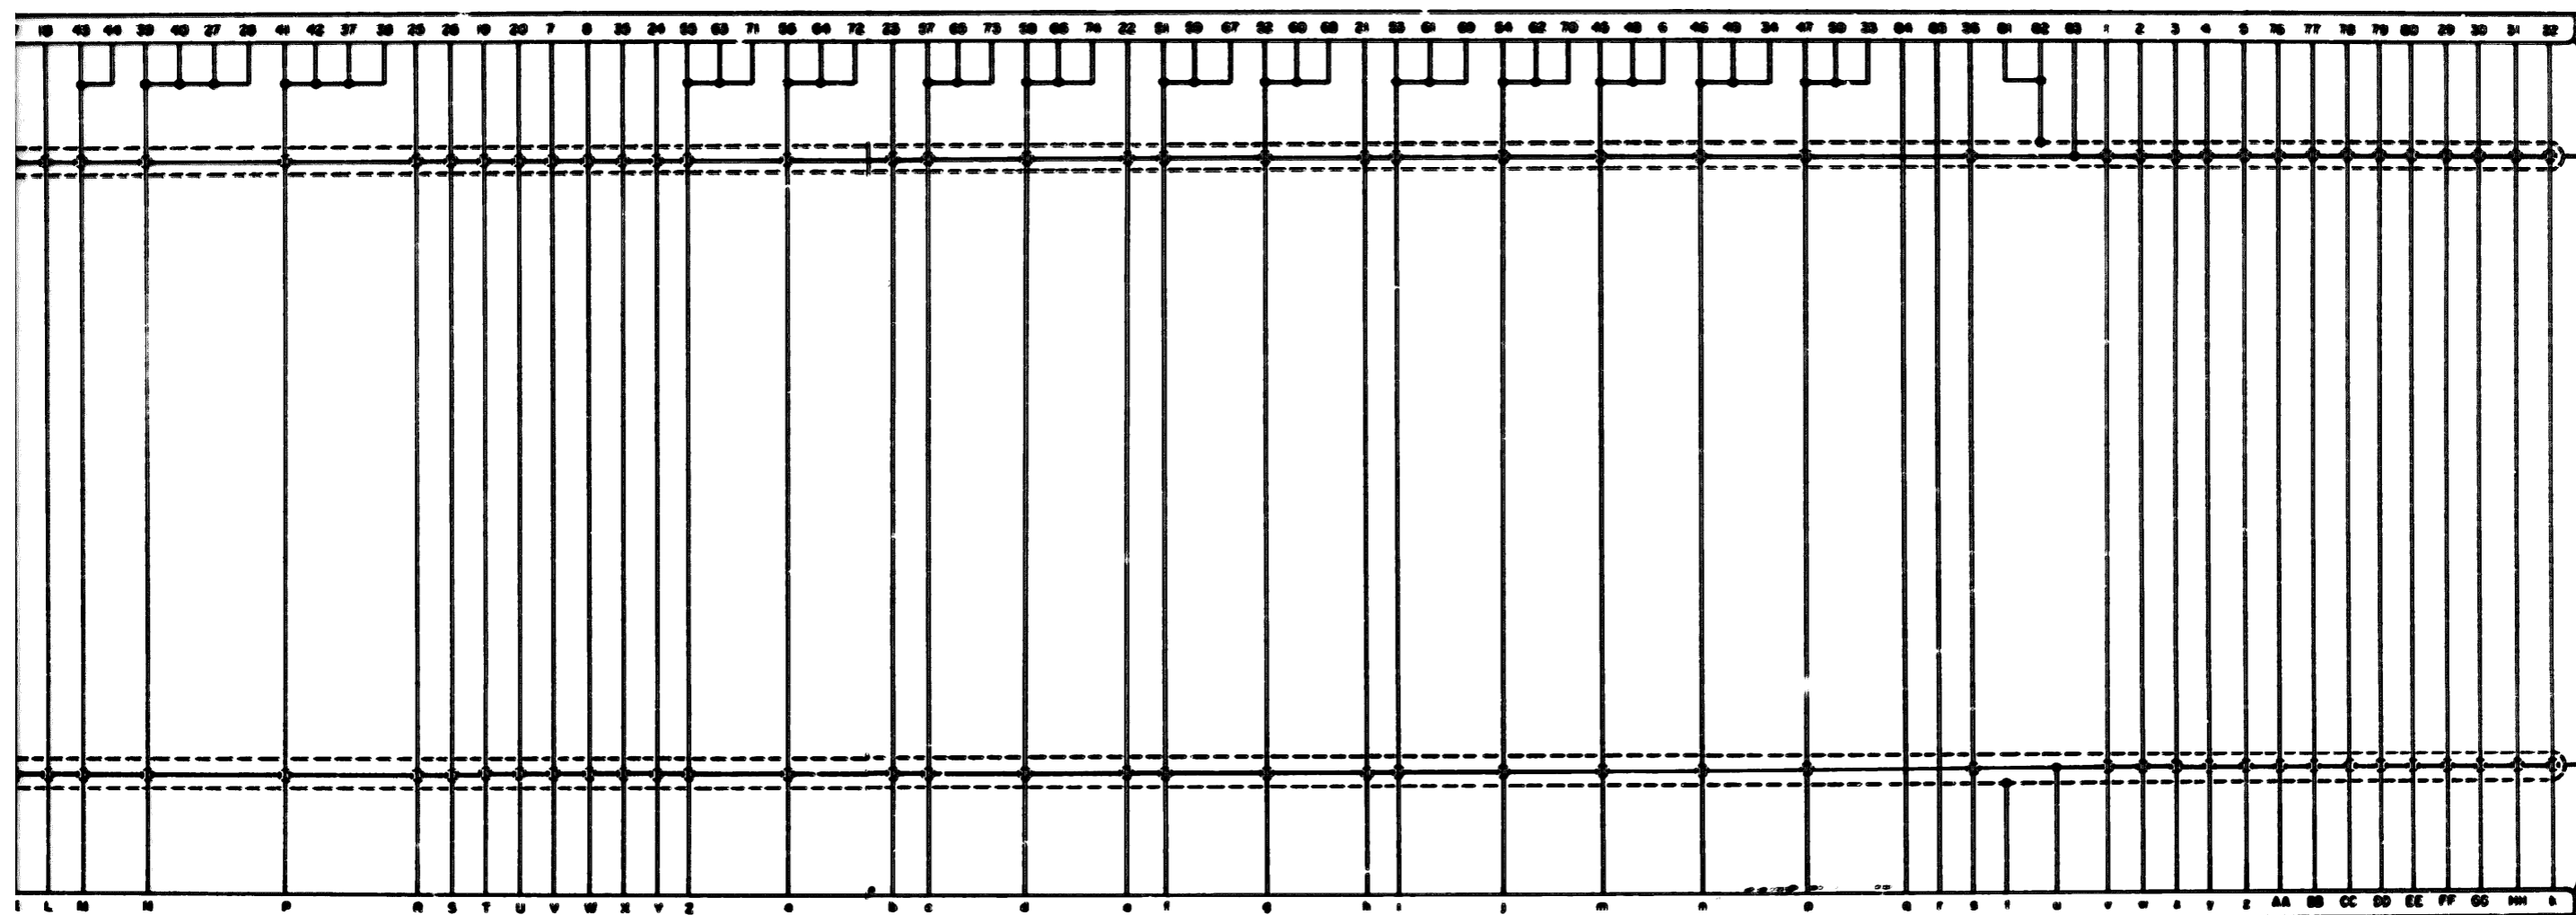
Cable Assembly, Special Purpose, Electrical CX-12715/AYM-3.
